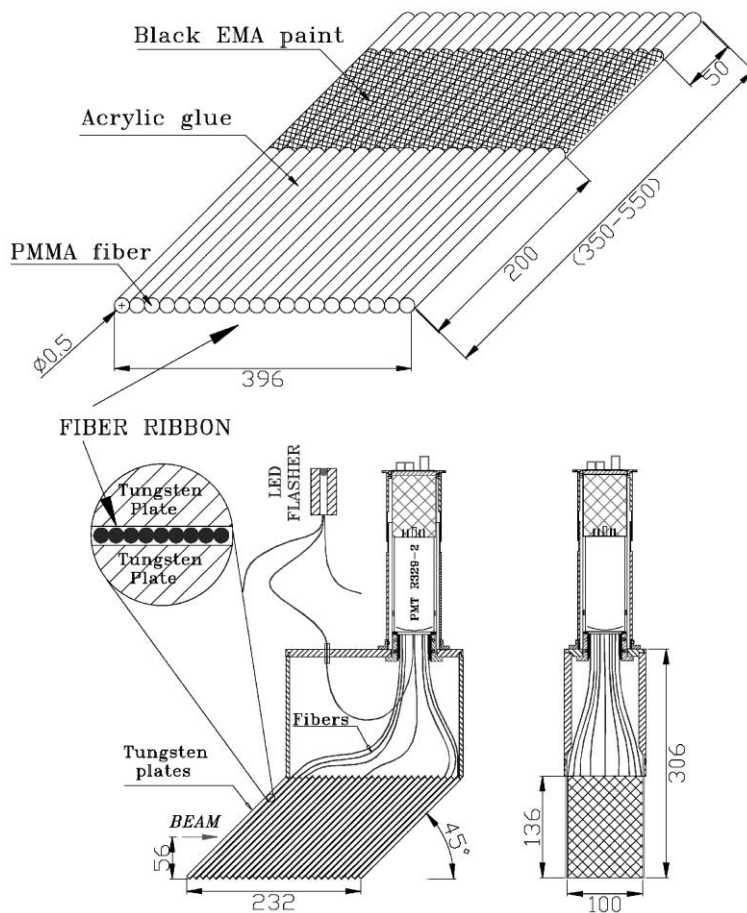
Mechanical design of the production tungsten modules. Dimensions shown are in mm.
